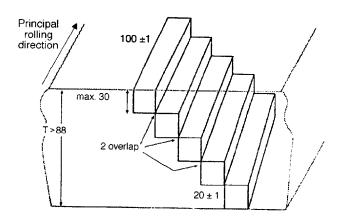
Test specimen location for plates over 88 mm (all dimensions in mm)
